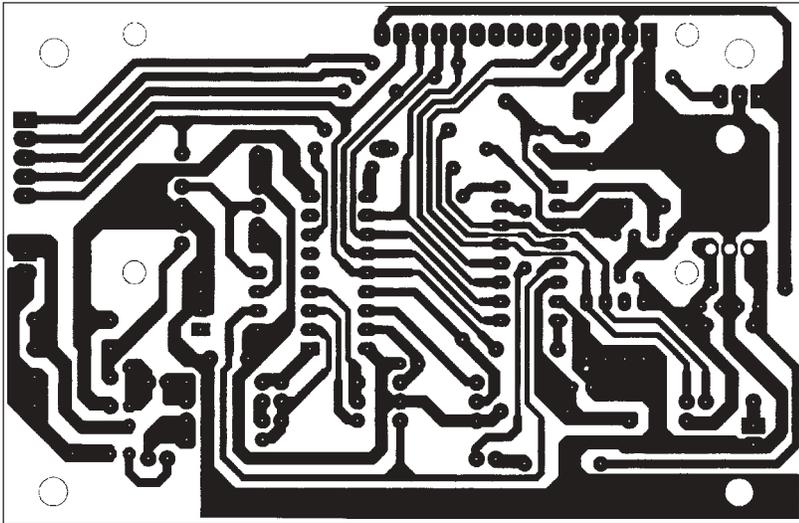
Actual-size, single-sided PCB layout for circuit in Fig. 10 except key-pad
